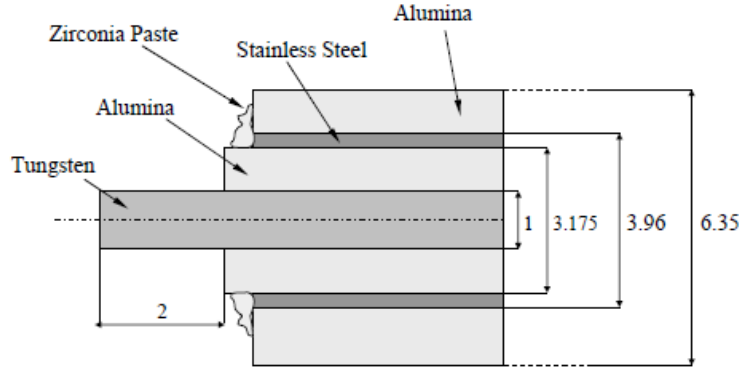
Langmuir emissive probe schematic. All dimensions are in millimeters.
